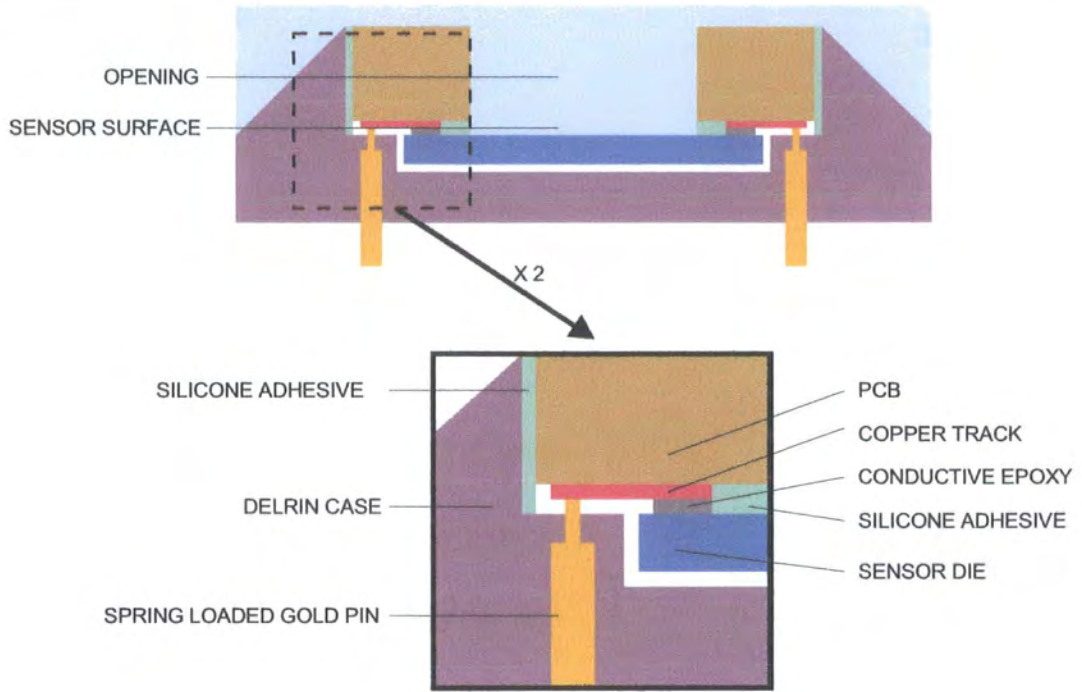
Cross-section schematic of prototype package. The detail shows the electrical contact method and liquid sealing.
